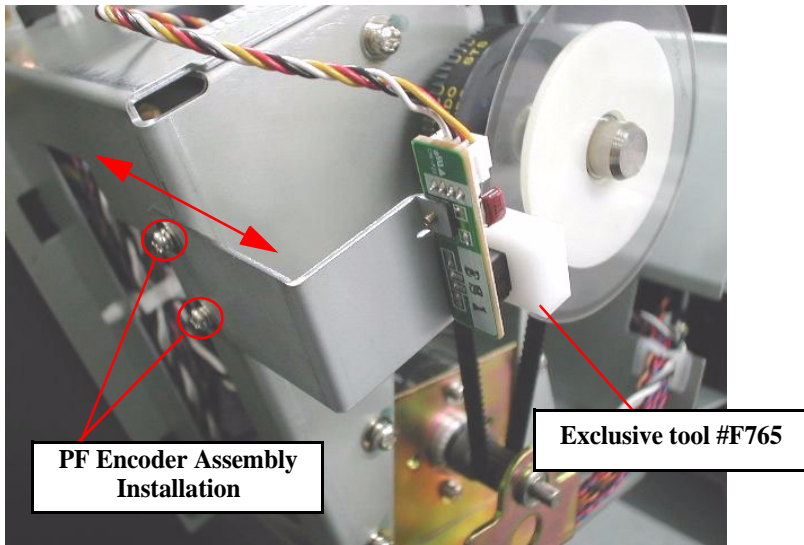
PF Encoder Sensor Installation Position Adjustment 2
